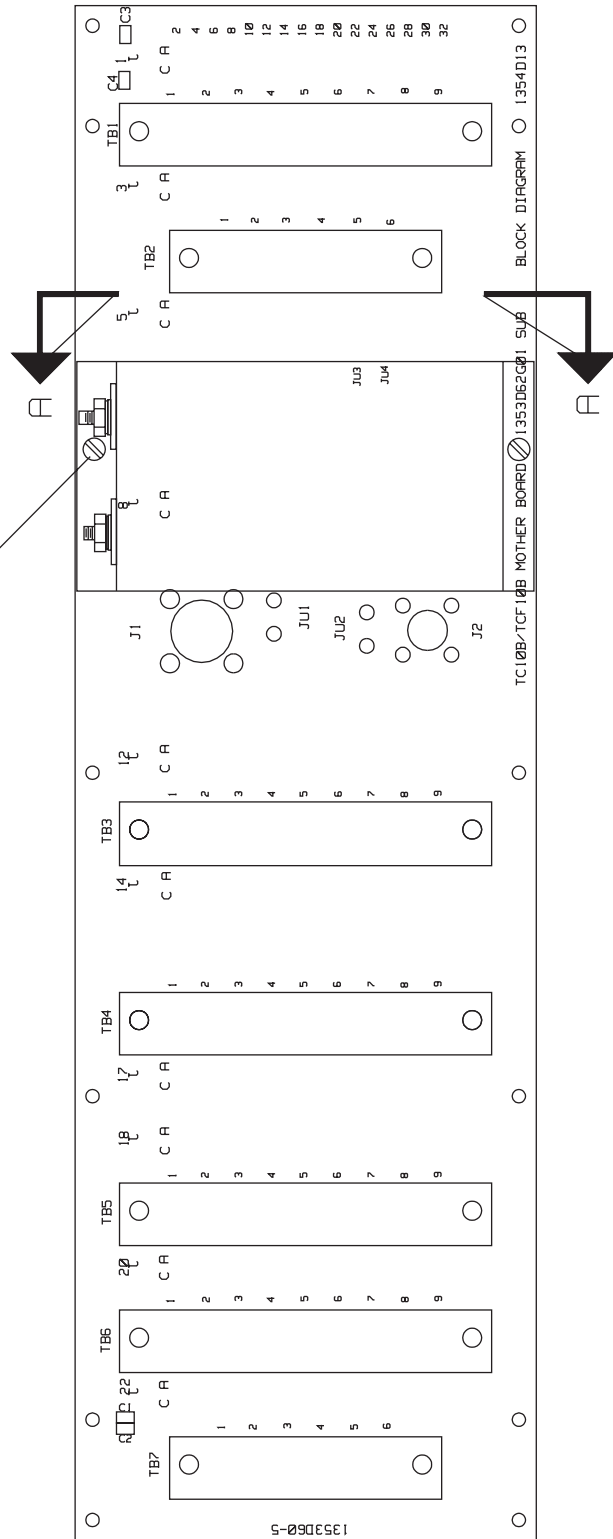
TC-10B Rear Panel – Mother Board (1354D16-12/1355D01).
